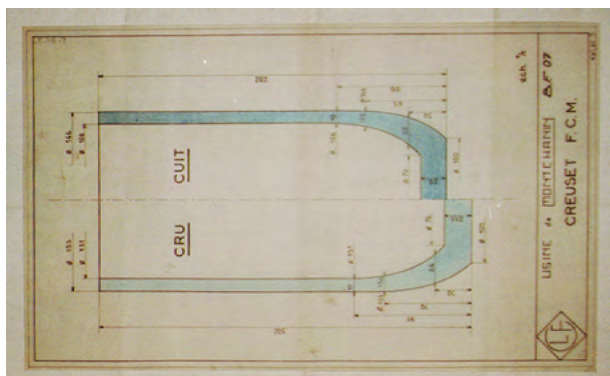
Le Creusot Ecomusée : Melting pot, drawing of manufactured part
